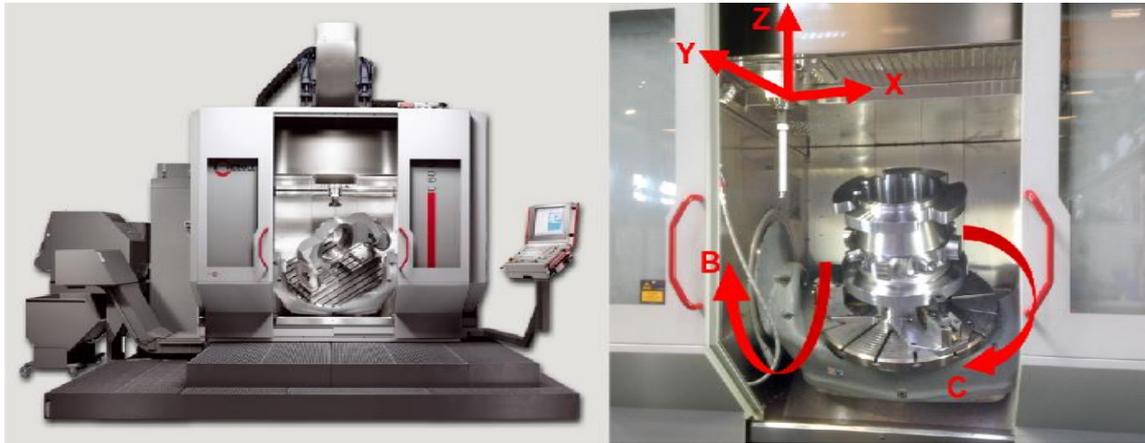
A Typical 5-Axis CNC Machine Tool
